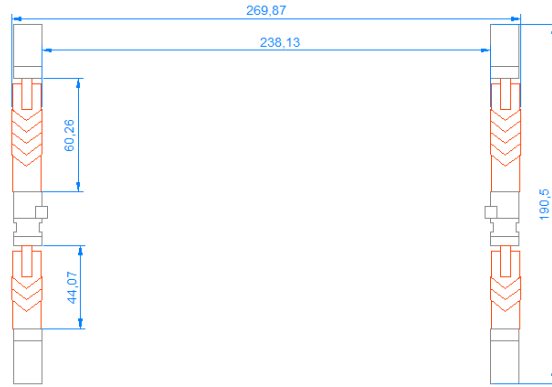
Seal Plug Chevron Seals with Dimensions (all dimensions in mm)
